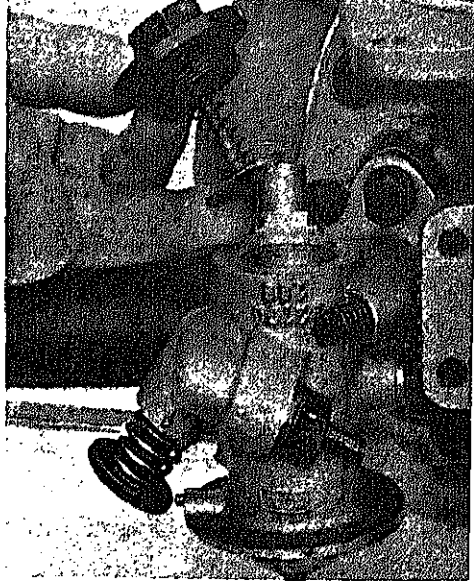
Unscrew the carburettor cover after which valve with spring can be removed
